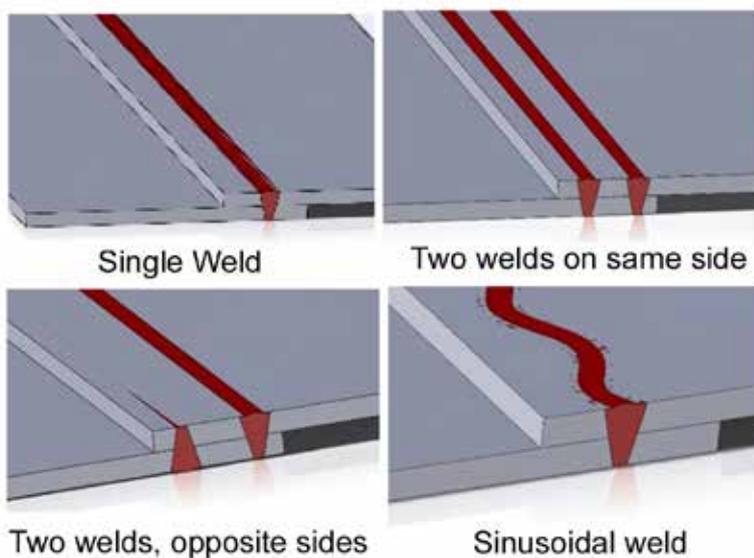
Possible weld configurations for titanium skin lap joints.
